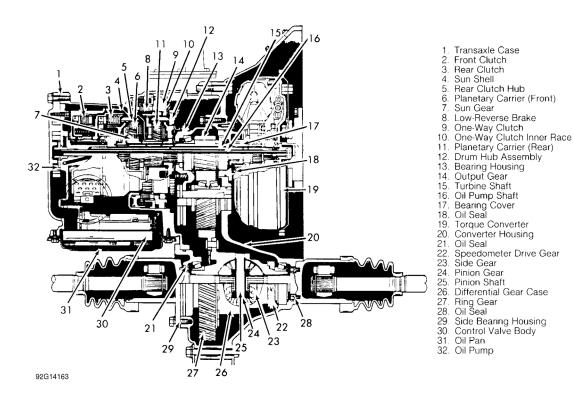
Transaxle Component Identification Courtesy of FORD MOTOR CO.
